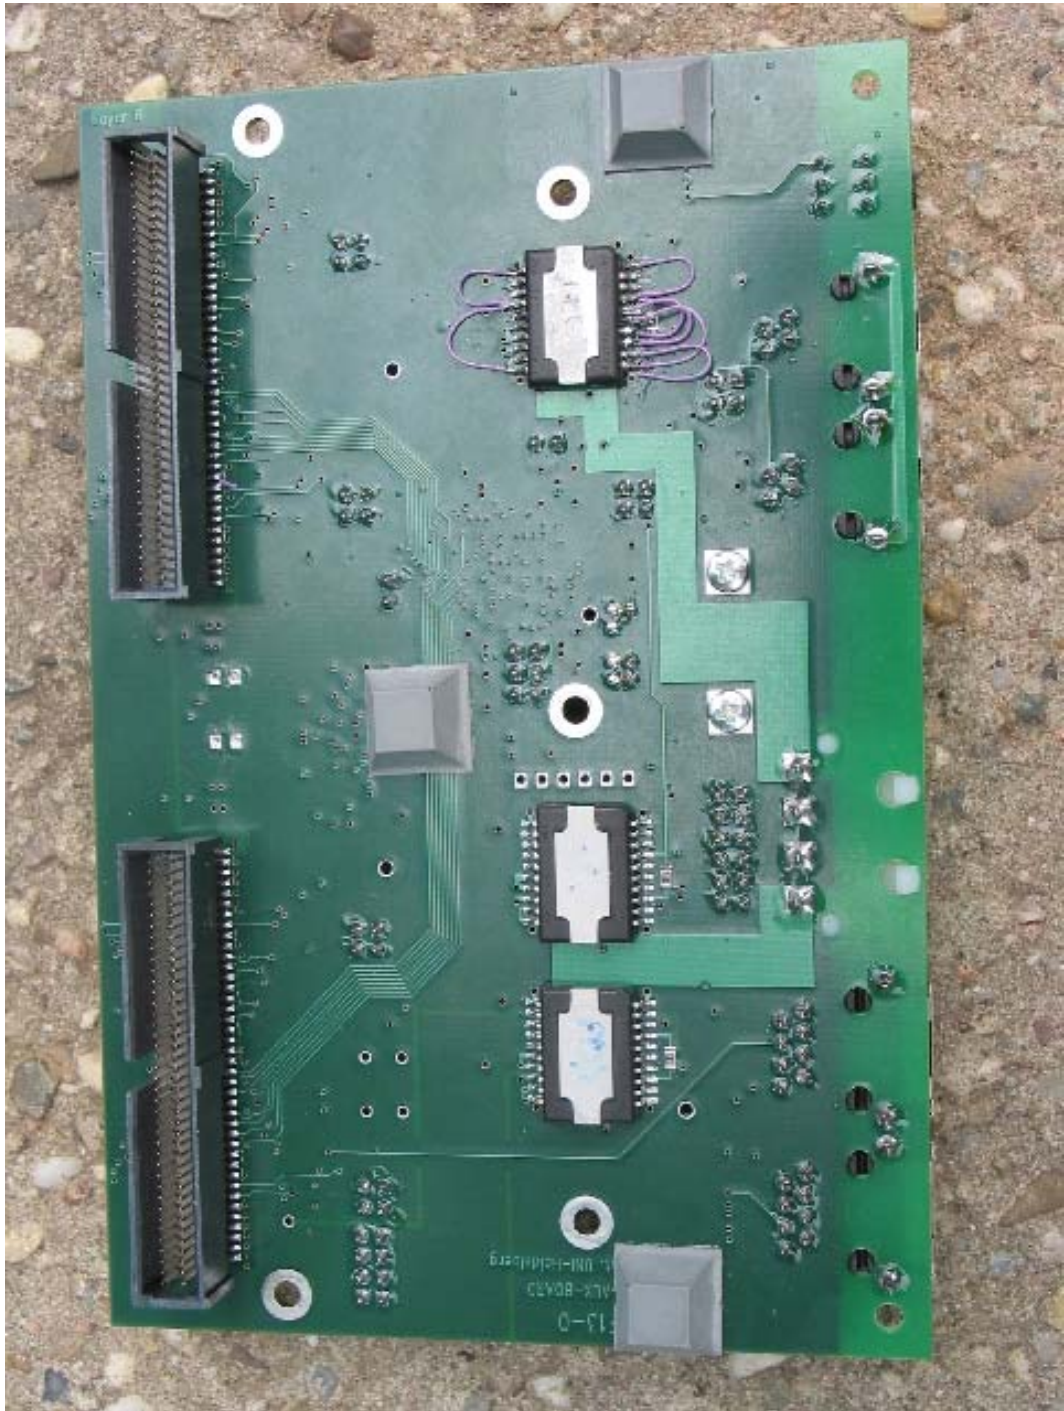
GOL-auxiliary board IF13-0 prototype, part side.
